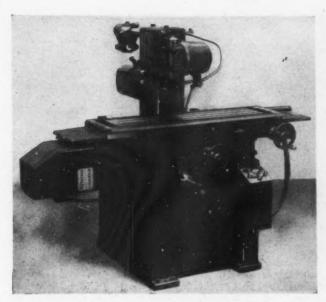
Birfield-Somun milling machine fitted with a universal swivelling spindle head
